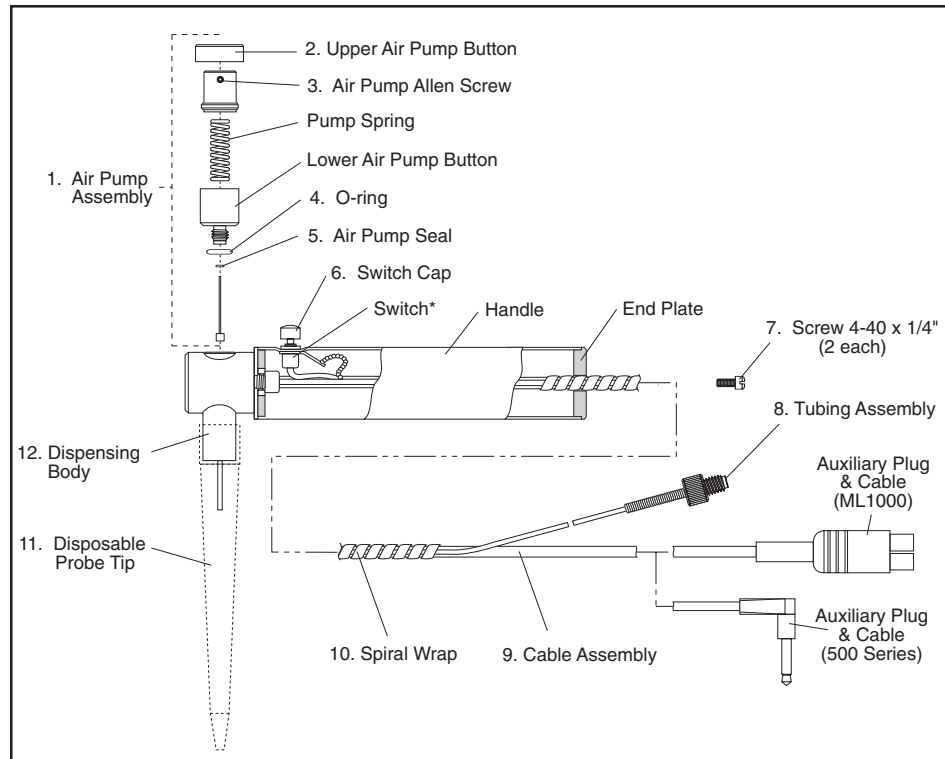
Exploded View Diagram of the Push-button Hand Probe
